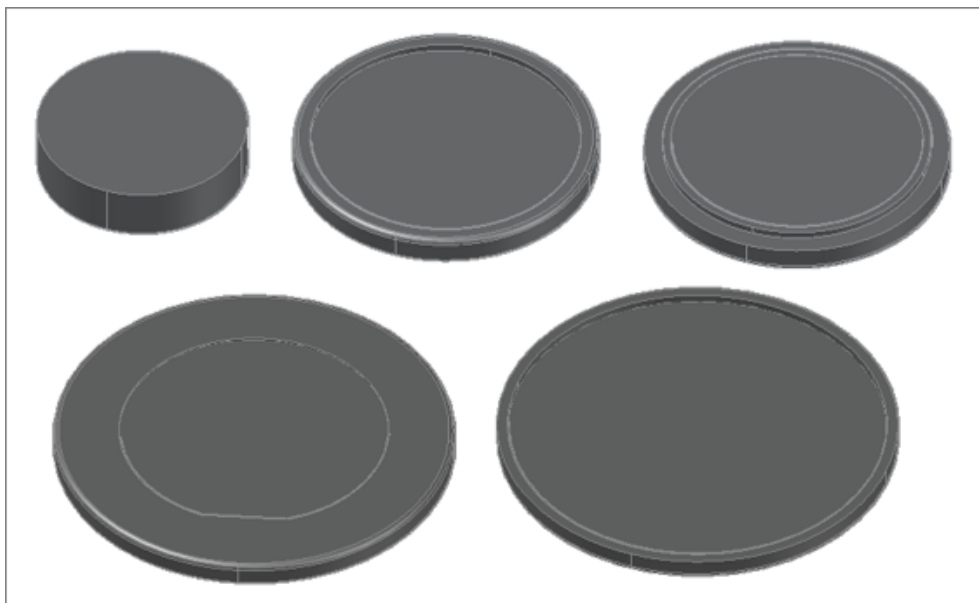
Schematics of the three molybdenum substrate holders used. Top row, from left: Holder 1; top side of holder 2; bottom side of holder 2. Bottom row, from left: Top side of holder 3; bottom side of holder 3.
